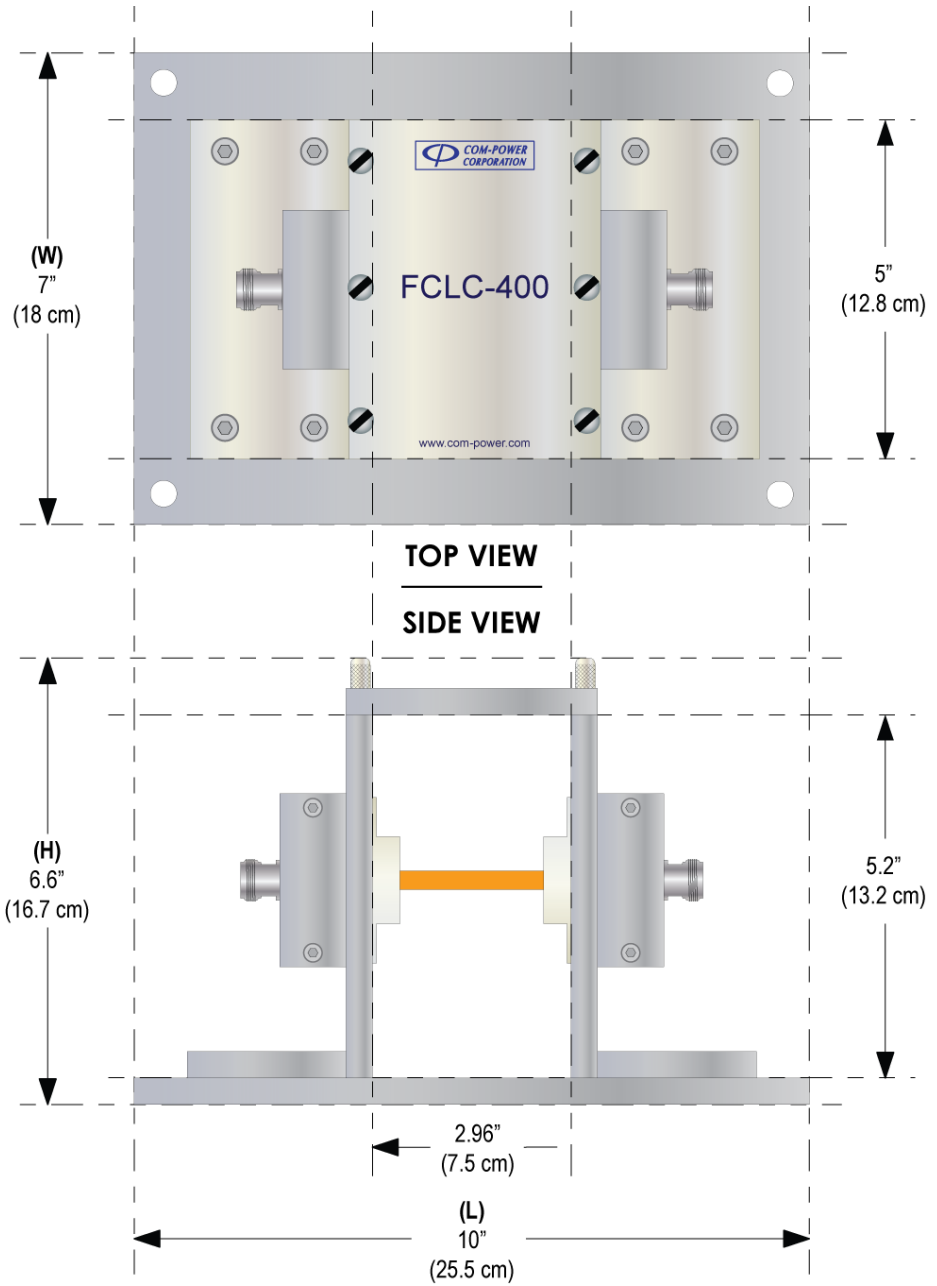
FCLC-400 Calibration Fixture Dimensions
